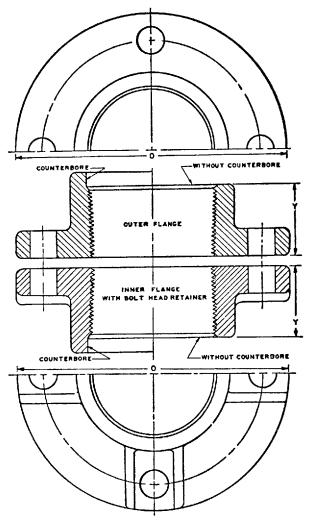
Bolted Piping Flanges (See Table 3 for Dimensions)
